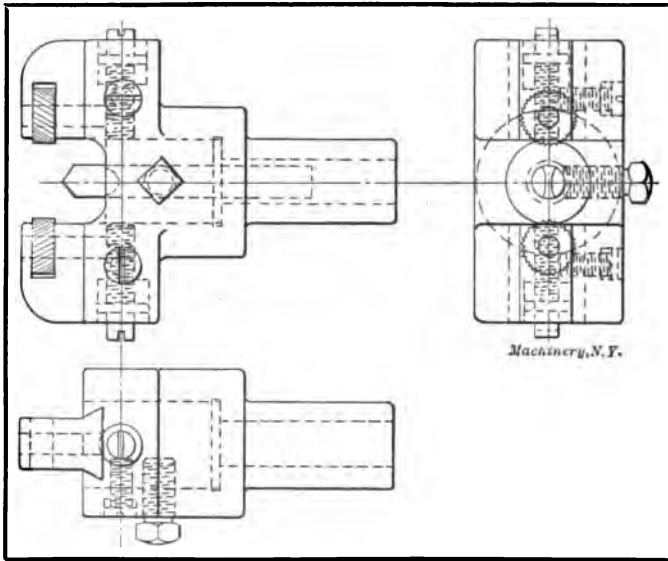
Turret Knurl-holder for Brown & Sharpe Automatic Screw Machines
